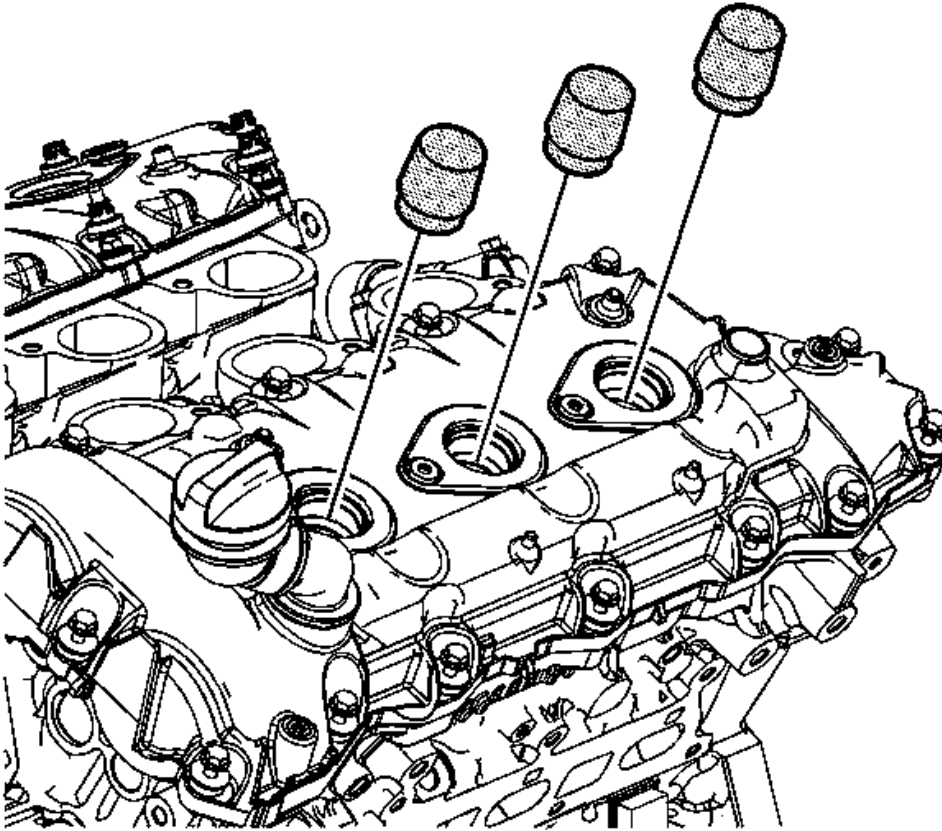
View of Spark Plug Tubes & Cylinder Head
